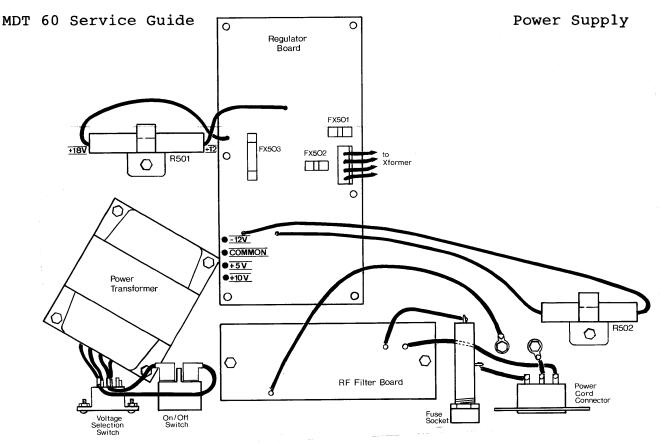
Power Supply Assemblies and Voltage Test Points
